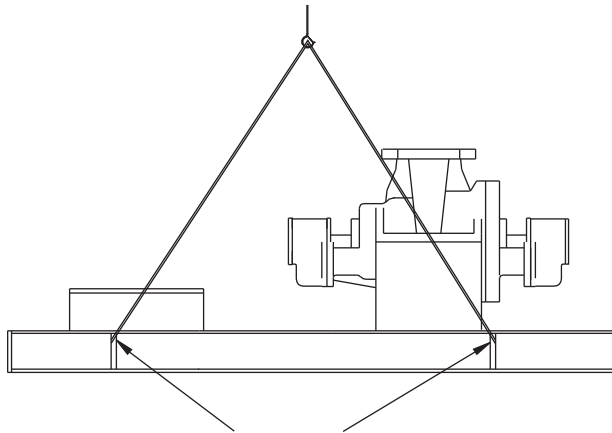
Example of the proper lifting method for baseplate-mounted units without a driver
